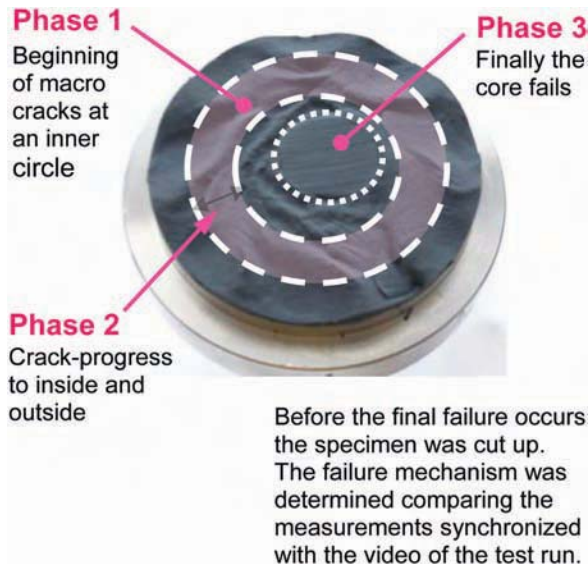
Hypothesis of fracture surface propagation [3].
